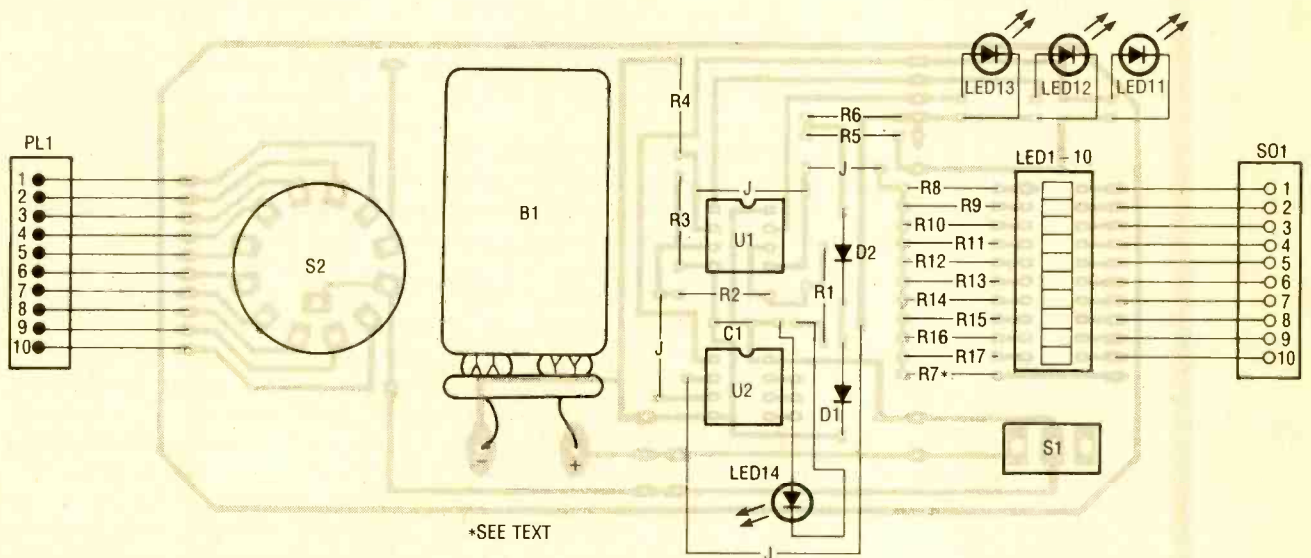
Once you've obtained the parts listed in the Parts List and etched a printed circuit board, begin assembling the board, using this parts-placement diagram as a guide.
